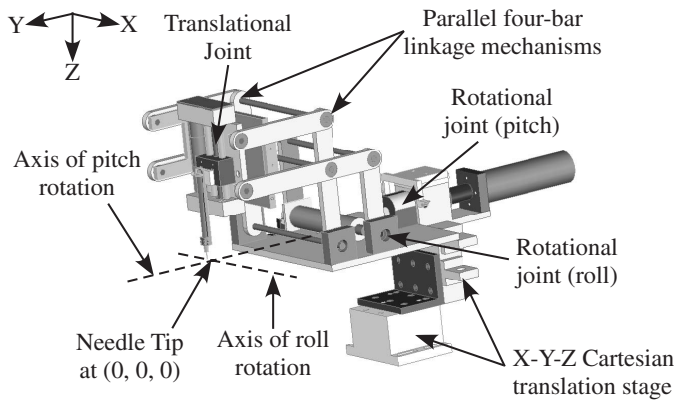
Three-dimensional CAD model of the needle-positioning robot.
